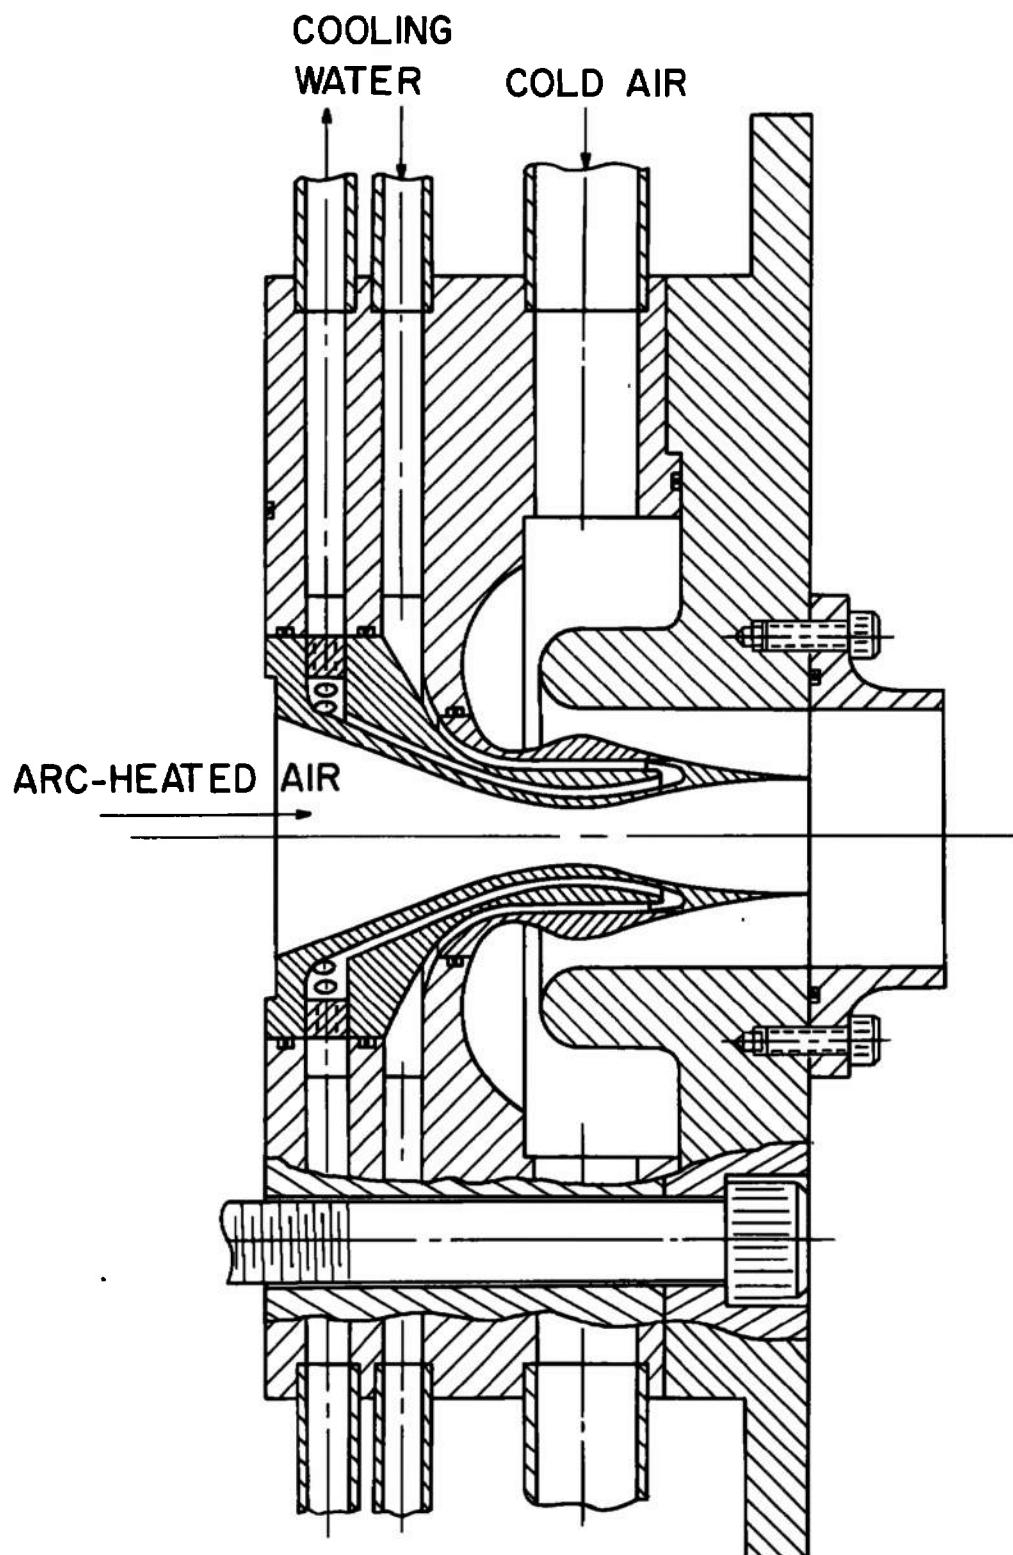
Coaxial Flow Nozzle Assembly Designed for Arc-Heater Applications
